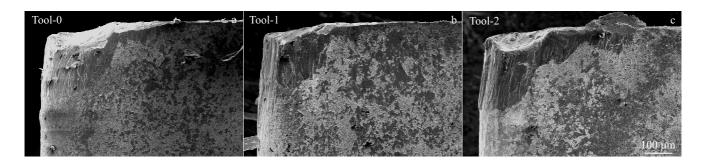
SEM images of the flank surface of different tool samples after cutting test: (a) Tool-0, (b) Tool-1, and (c) Tool-2
